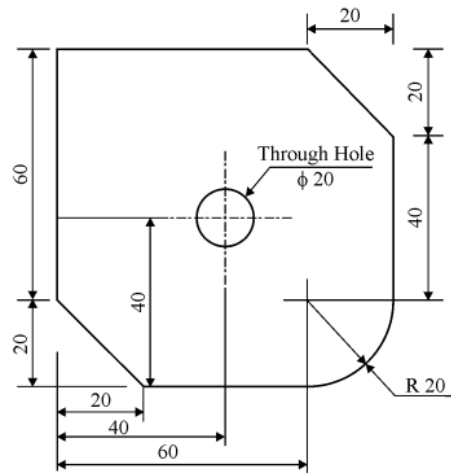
Plate Thickness is 25 mm. All dimensions are in mm. Fig. 4
